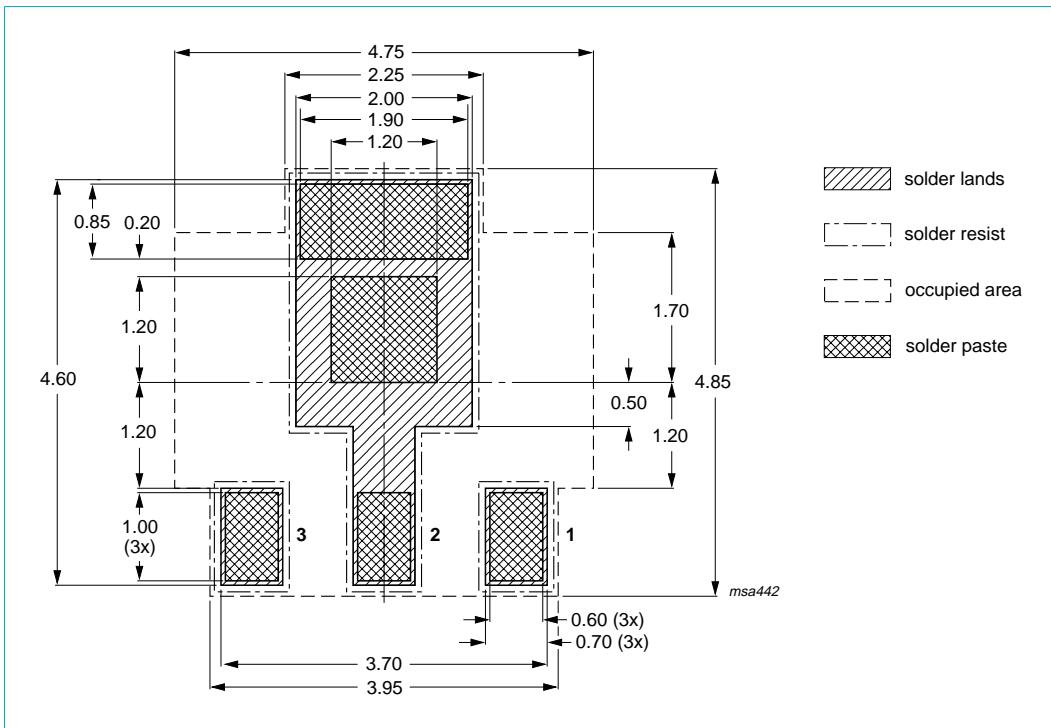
Reflow soldering footprint SOT89 (SC-62)
